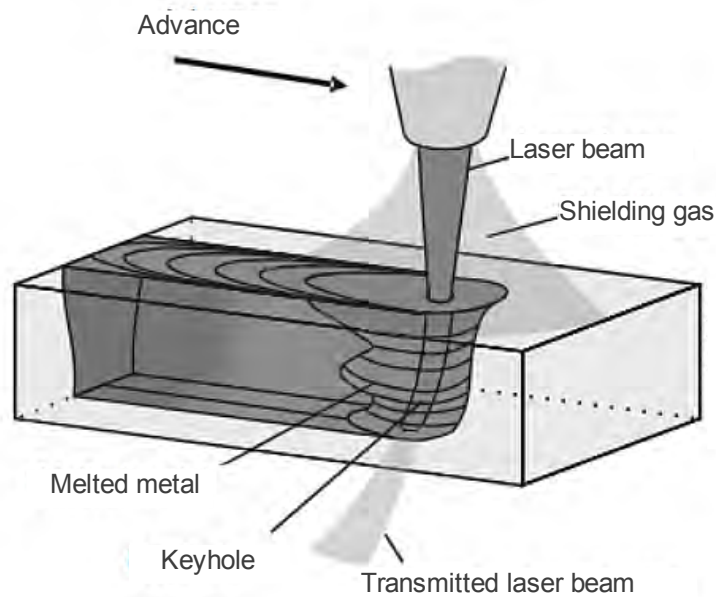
Schematic view of laser-beam welding [19]
